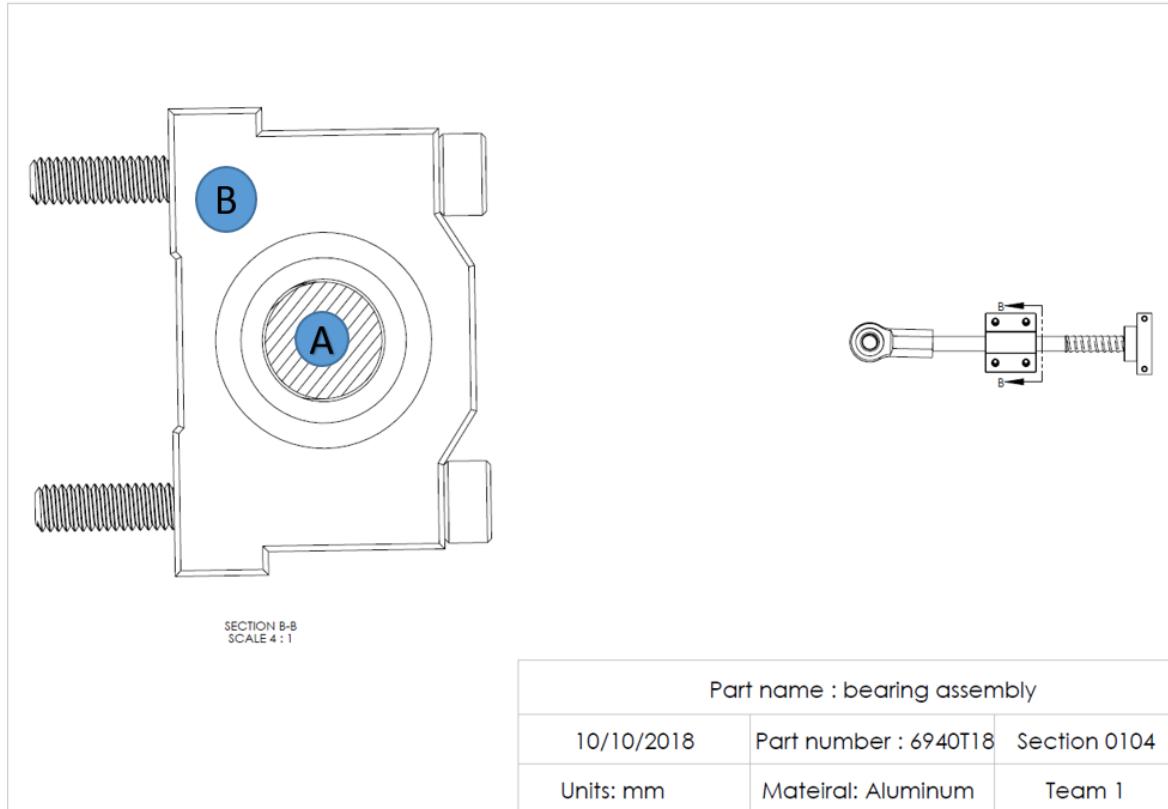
Engineering drawing showing a cross section of the bearing and shaft
